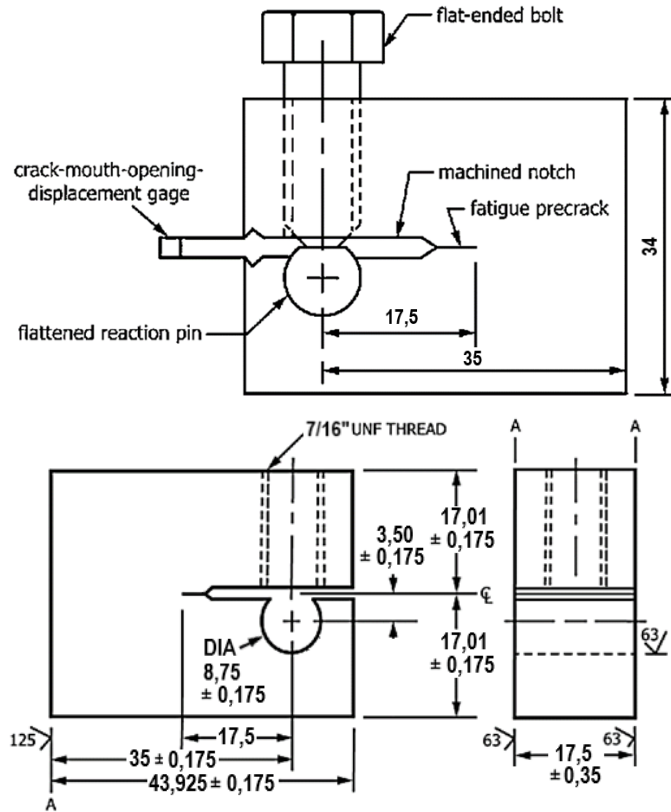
Schematic drawing of test assembly for constant-displacement testing of bolt-load compact specimens and its dimensions. Adapted from ASTM E1681 (2023).
